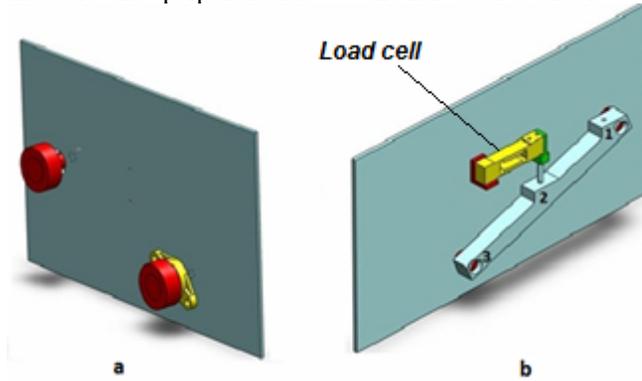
Scheme of weighing platform: a) inner side; b) outer side
